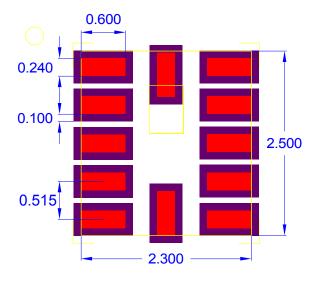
Welding Pad Schematic (Unit: mm)
